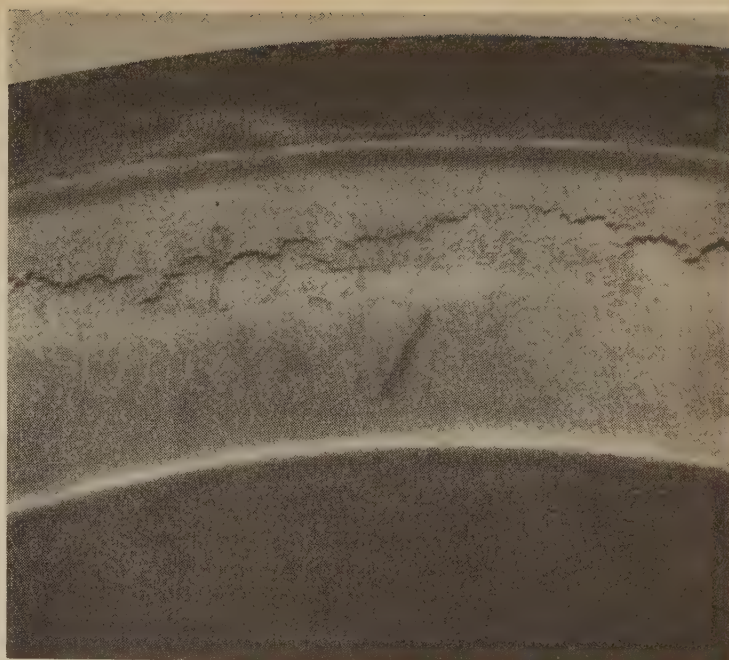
A crack in the surface of an aluminum alloy diecasting caused by a bending stress created by uneven ejection of the casting from the die cavity.
